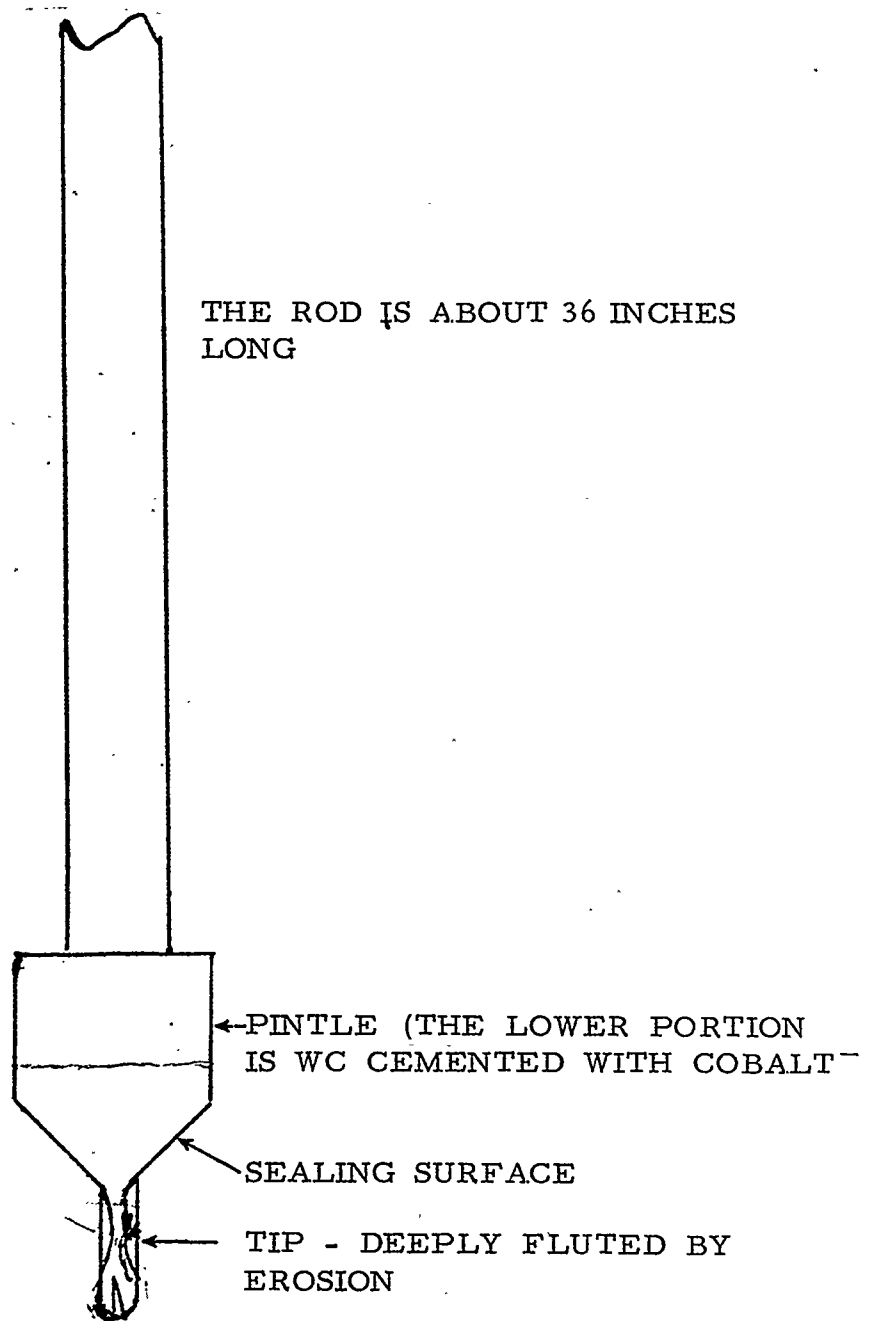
Valve rod with pintle; the rod diameter, pintle and tip are drawn to scale.
